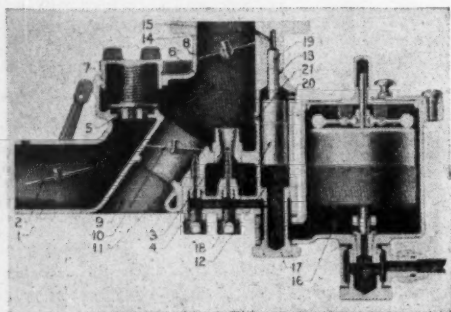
A cross-section of the Ball and Ball carburetor as used on the 1918 Oldsmobile
